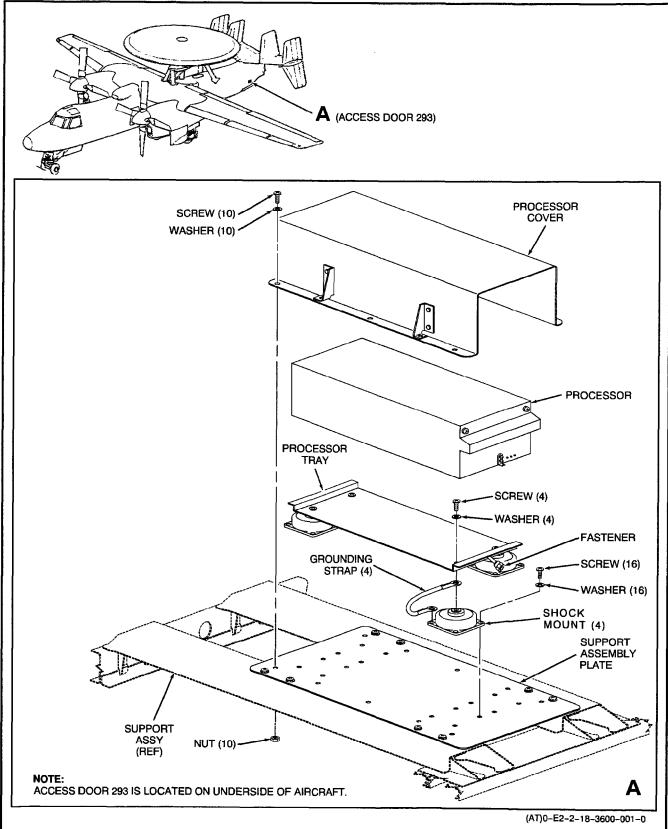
Removal and Installation of Electrical Equipment Mounting Base MT-6811/AMS-2
